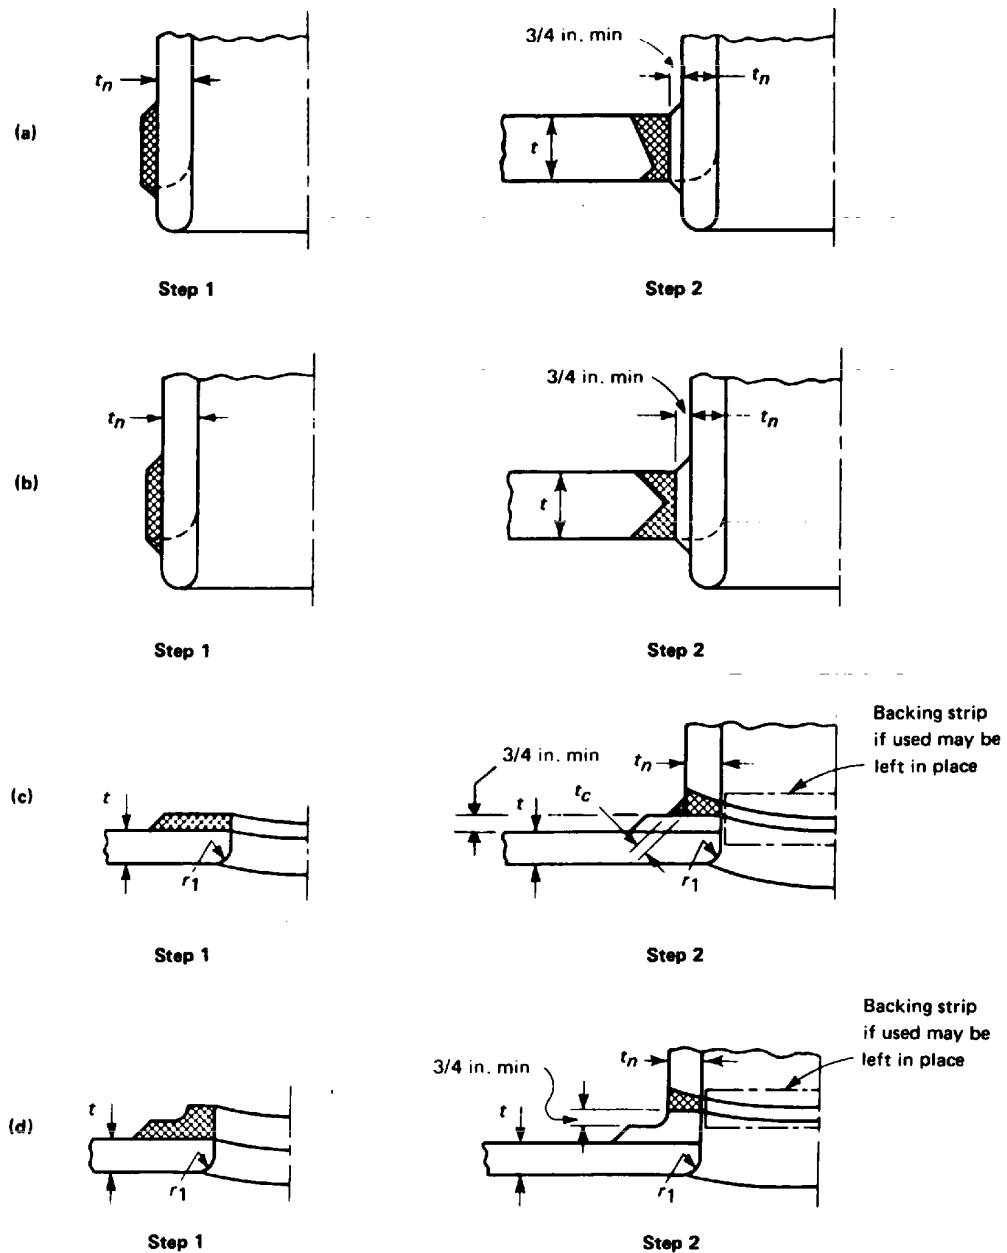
(c)-1 DEPOSITED WELD METAL USED AS REINFORCEMENT OF OPENINGS FOR NOZZLES AND BRANCH AND PIPING CONNECTIONS
